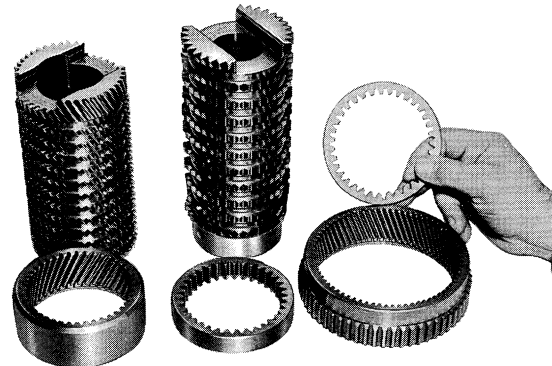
Spur and helical gears whose internal teeth are produced in one pass by broaches equipped with full-form finishing shells.
